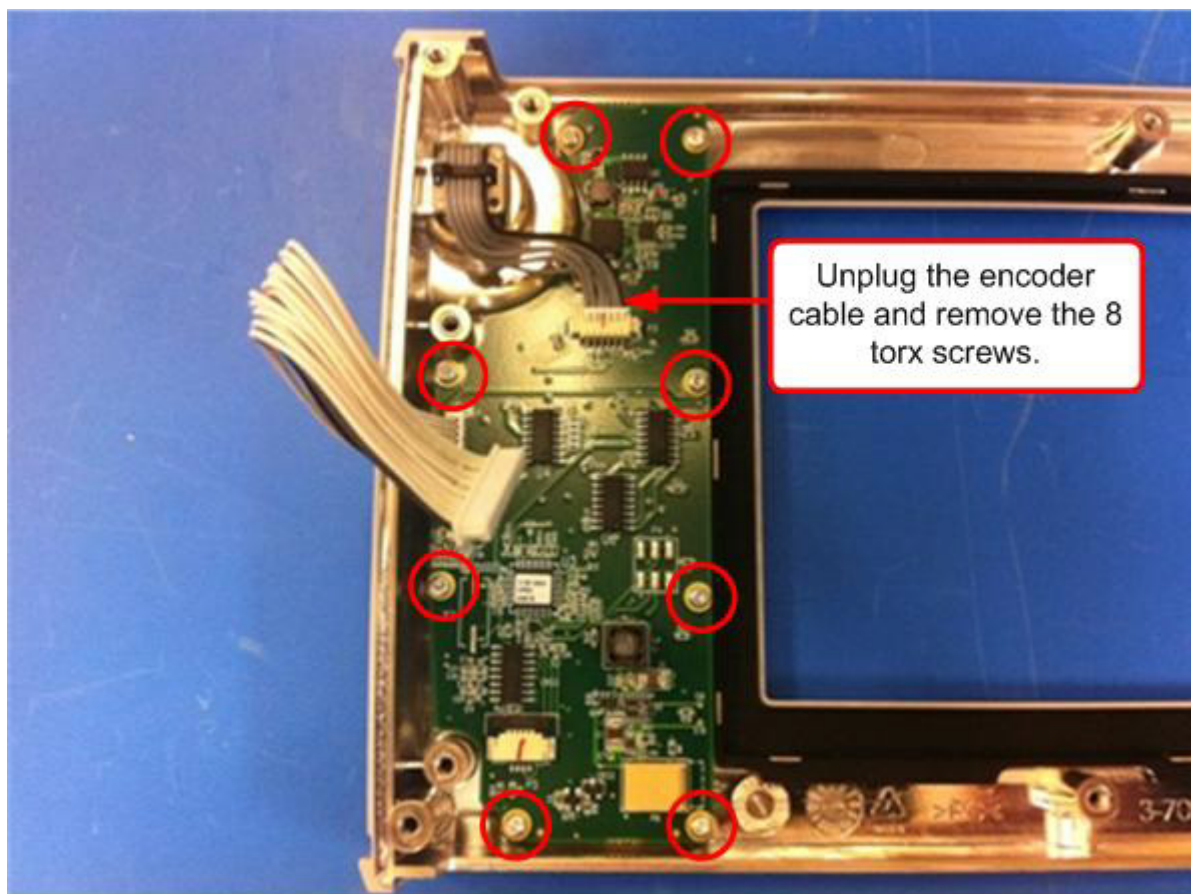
Remove Encoder Cable and 8 Torx Screws
